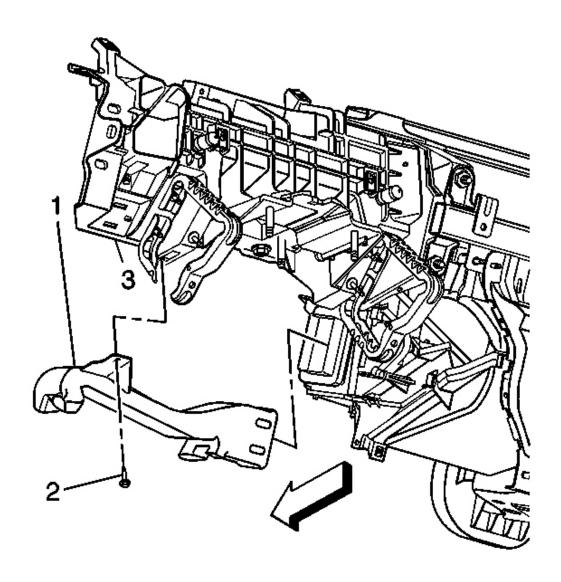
View Of Left Side HVAC Floor Air Outlet Duct Courtesy of GENERAL MOTORS CORP.
